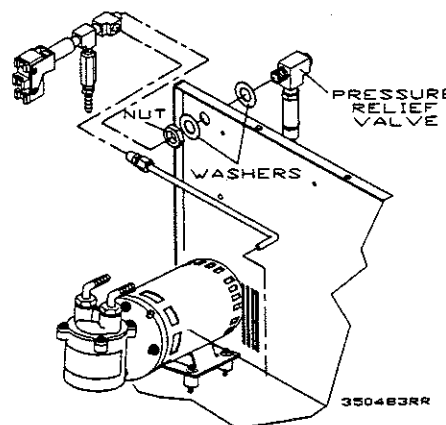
PRESSURE RELIEF VALVE REPLACEMENT
